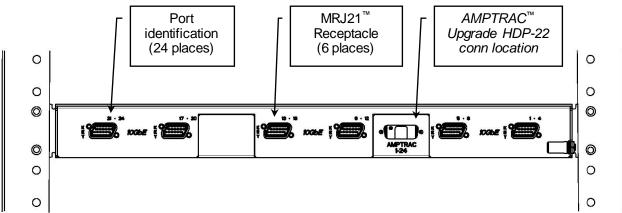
(2153041-1 panel as shown. Use appropriate customer drawing for other panel views)
